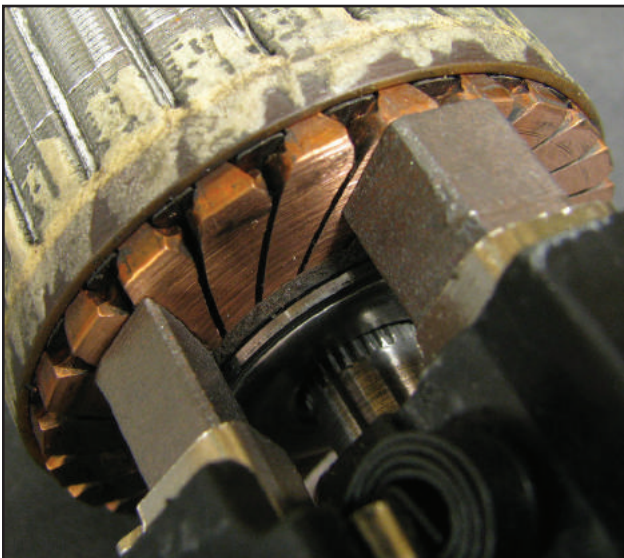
Insure that you do not mismatch armature with brush holder. Make sure that the brushes align with the bars.
